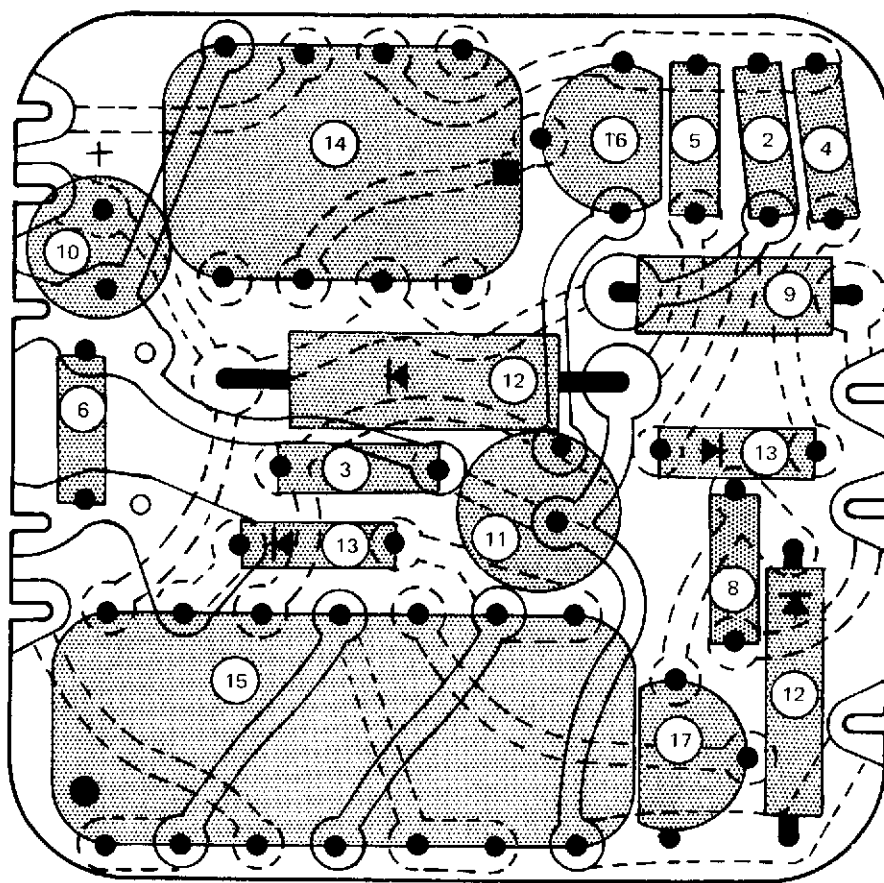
CIRCUIT BOARD ASSEMBLY – TOP 1 AMP AC POWER CONTROLLER
